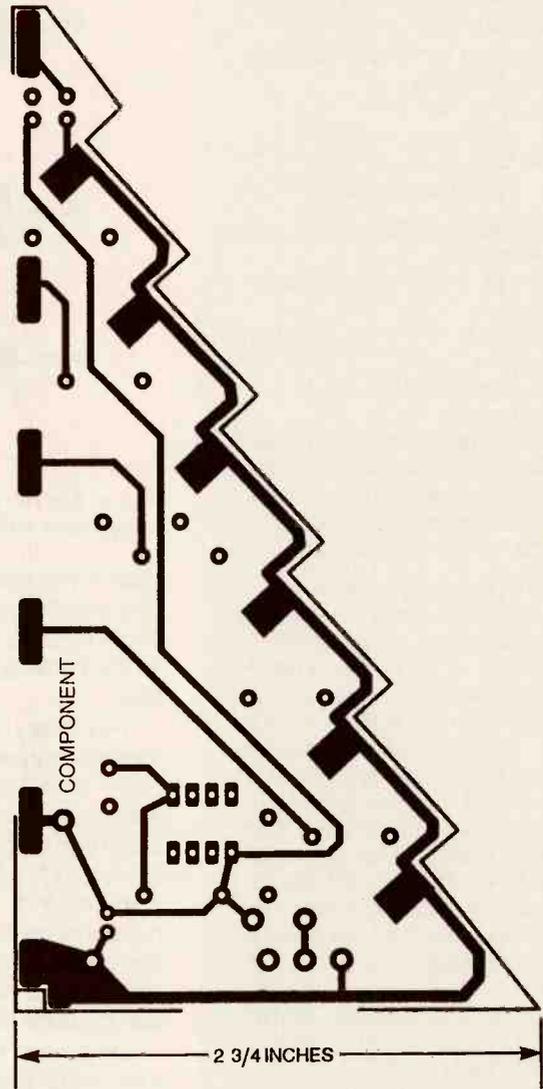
Here's the component side of the board. Remember that you will need three boards to build the Tree.
